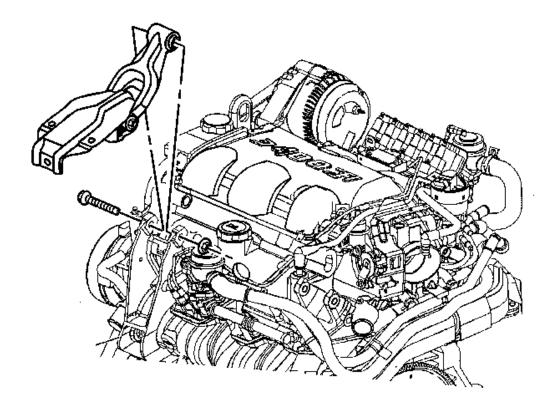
Installing Engine Mount Strut Bolt & Nut - Right Courtesy of GENERAL MOTORS CORP.
